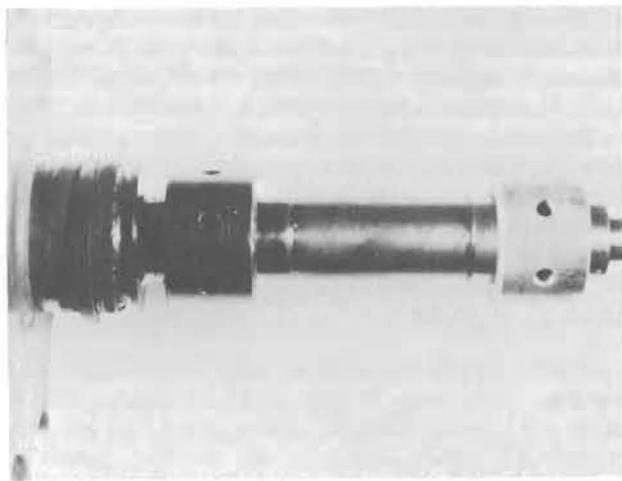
Turbine and journal bearing seized on the turbine shaft. The shaft shows signs of severe oil coking after 233 hours of engine operation with a 50/50 sunflower oil/diesel fuel mixture.
